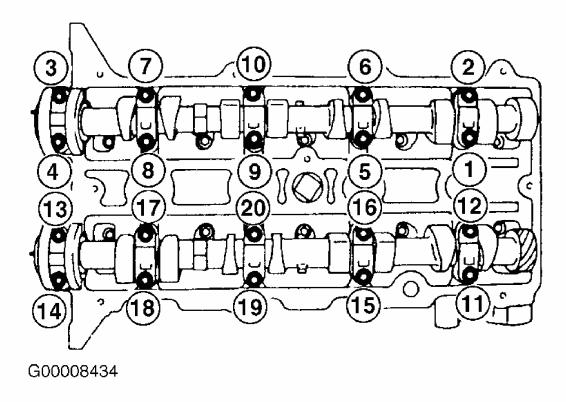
Camshaft Bearing Cap Bolt Loosening Sequence (Protege) Courtesy of MAZDA MOTOR CORP.
